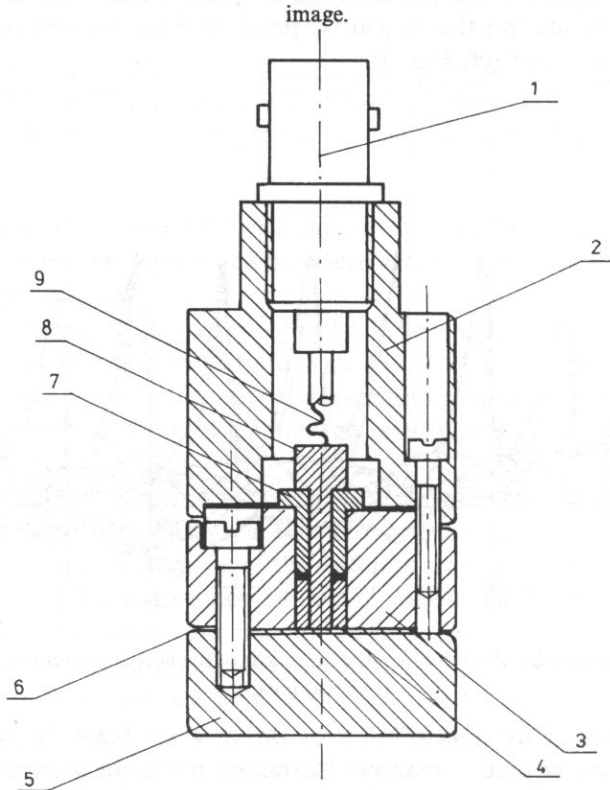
The design assembly drawing of the capacitance transducer. 1 — signal connector, 2 — metal housing, 3 — electrode holder, 4 — electrode reductor, 5 — metal front plate, 6 — metal foil 50  $\mu\text{m}$  thick, 7 — isolating tube, 8 — brass electrode, 9 — connecting wire.
